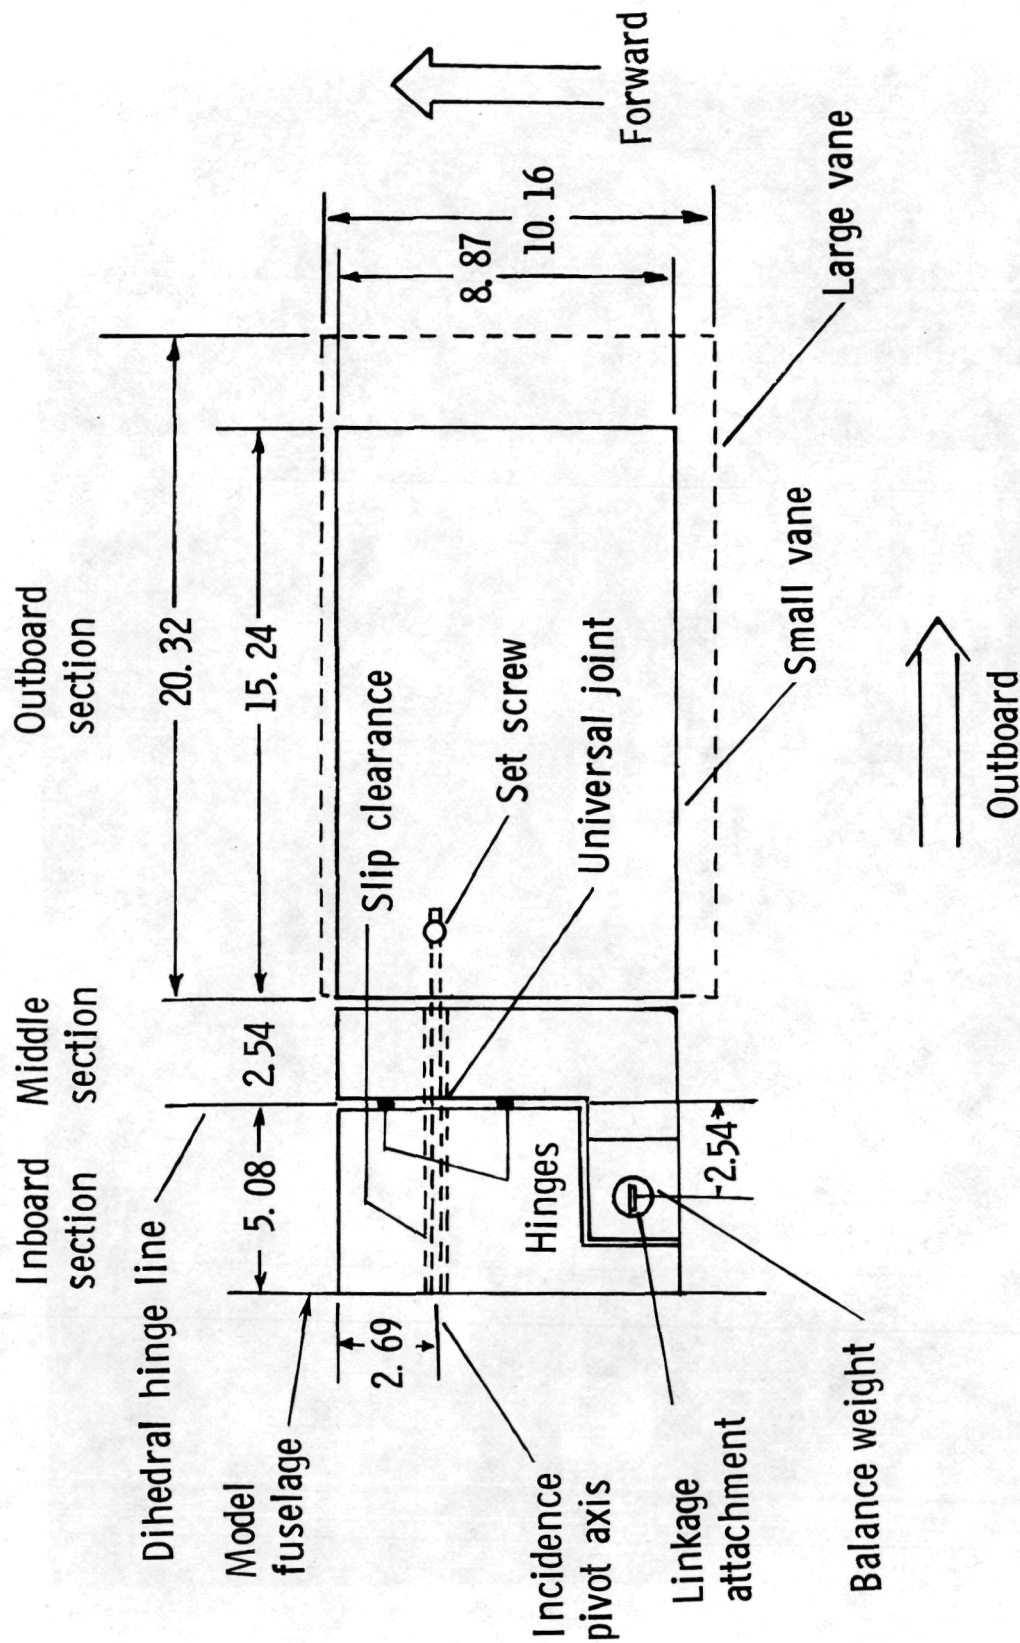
Detailed view of vane(s). All dimensions are in cm.
